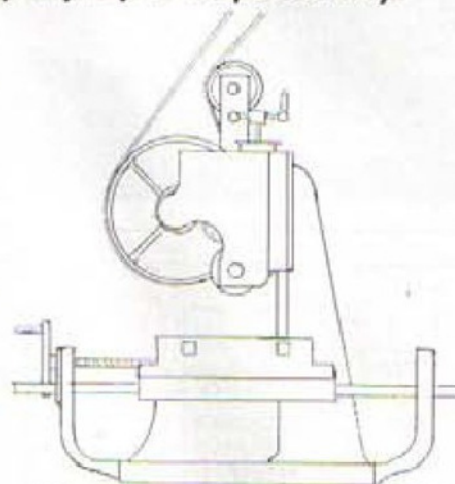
Sketch of Gay and Silver miller with adjustment on head, 1841.
